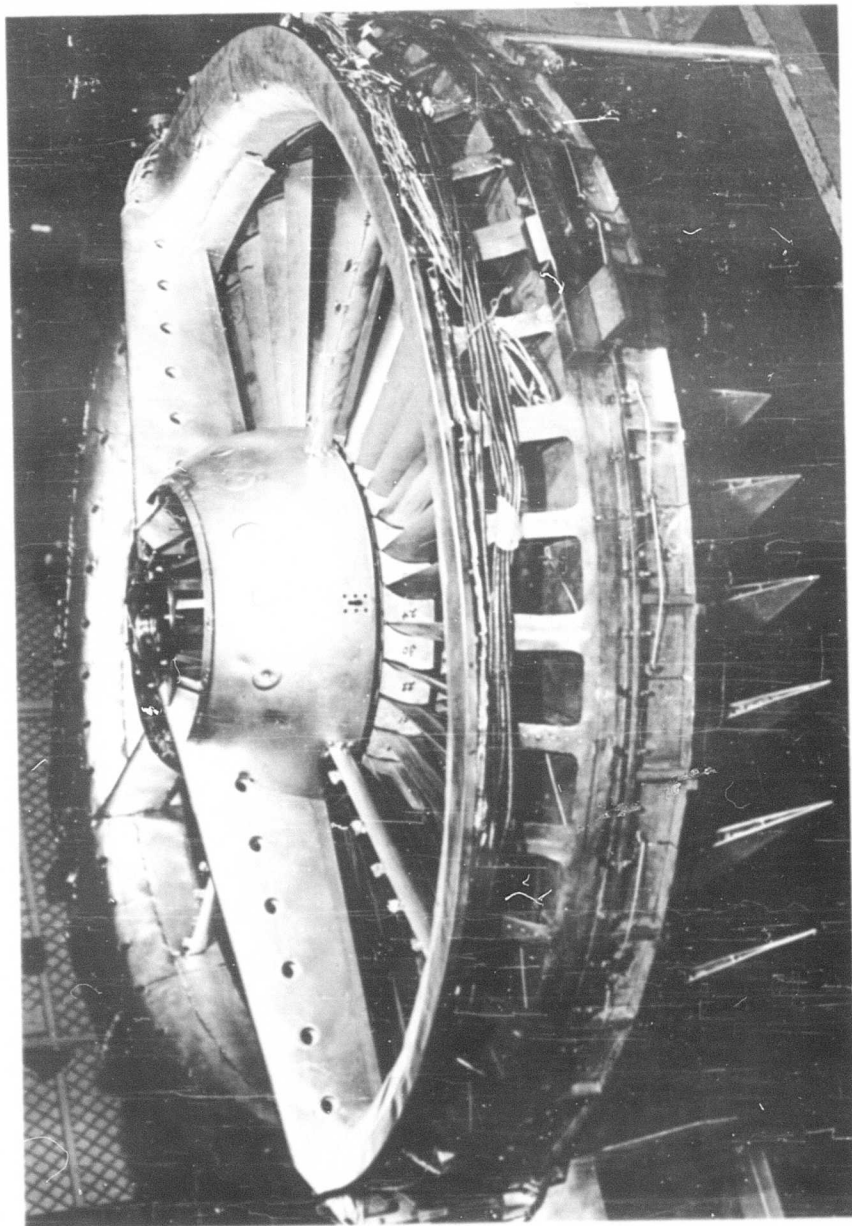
FAN ASSEMBLY SHOWING INLET BAFFLE WELDED TO FORWARD FRAME
